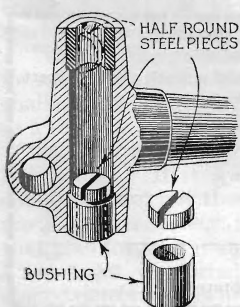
To take out spindle bushings, a soft steel disk cut in the shape of a half-moon has been devised
